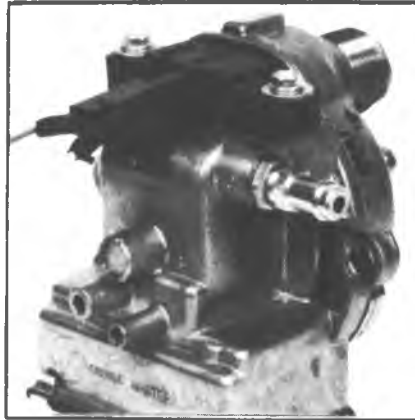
C-34--Wiper Motor and Gear Box Assembly
